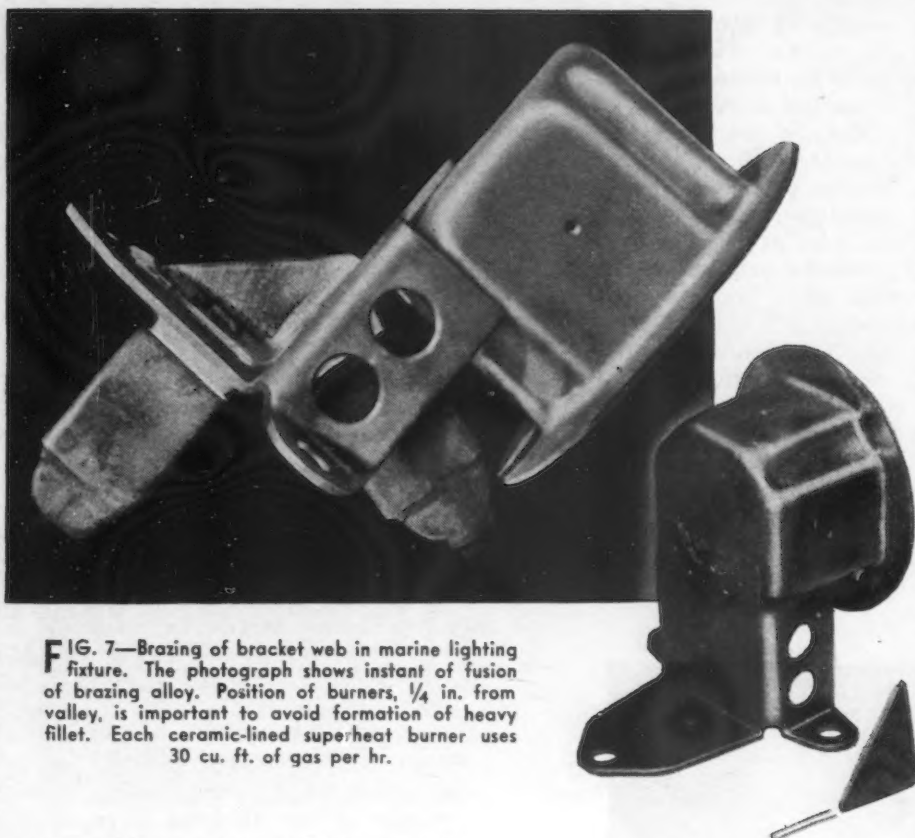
Brazing of bracket web in marine lighting fixture. The photograph shows instant of fusion of brazing alloy. Position of burners, $\frac{1}{4}$ in. from valley, is important to avoid formation of heavy fillet. Each ceramic-lined superheat burner uses 30 cu. ft. of gas per hr.
